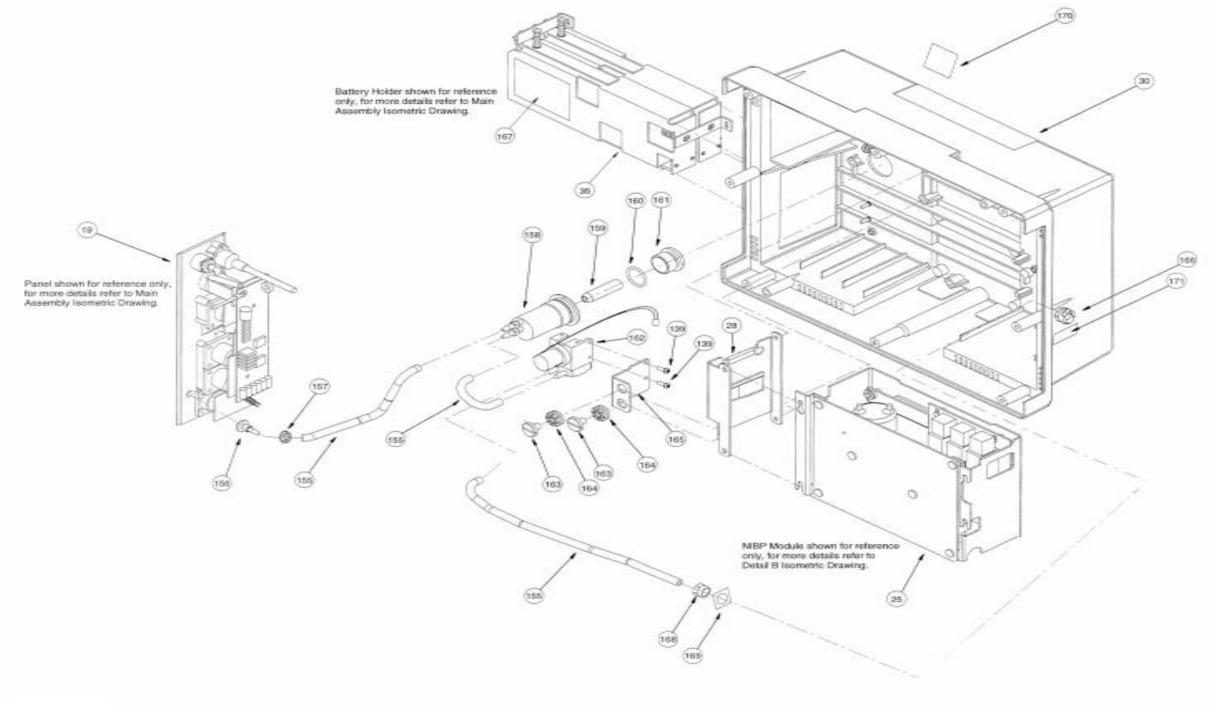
XG Rear Housing with Sidestream Parts
